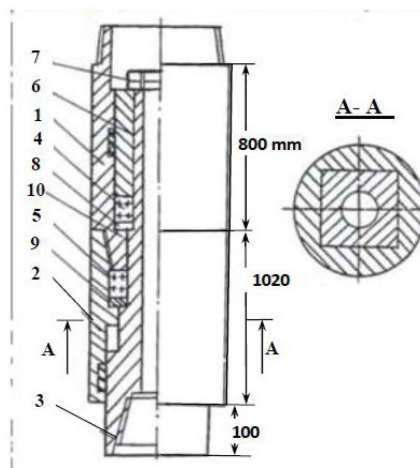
Explodable top 1 and bottom 2 of the shock absorber housing.
